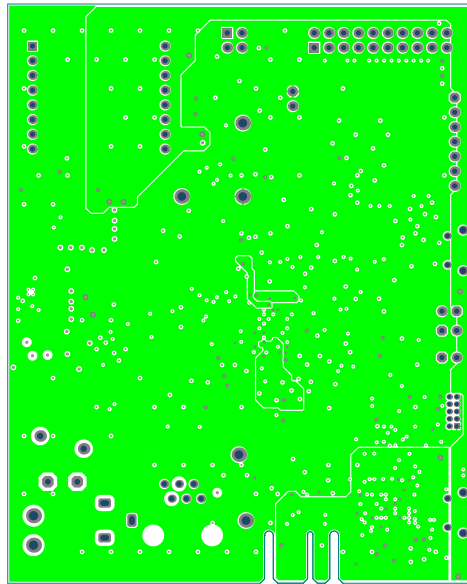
PL485-EK rev1 Layout: Bottom Layer
